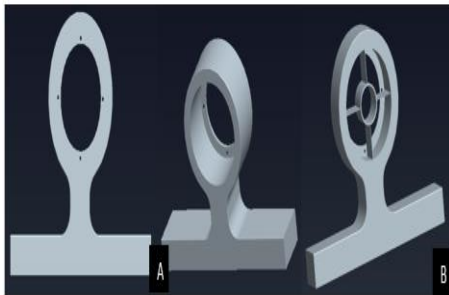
(a) Cutter housing (hub) (b) sub-assembly for cutter hub with cutter blade (Die)
